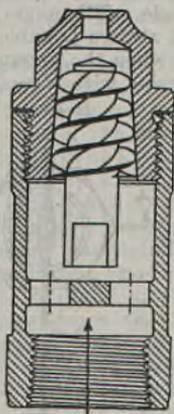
A small hollow-cone nozzle of the fixed spiral type. (Courtesy of Schutte and Koerting Co.)
